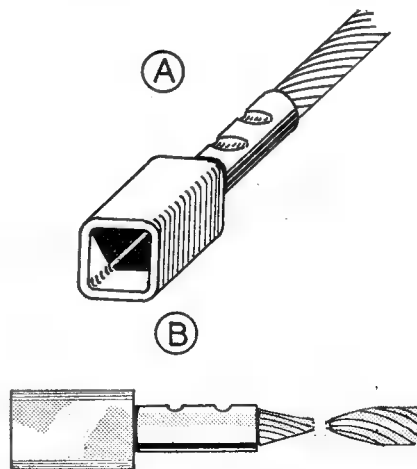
(A) the speedometer cable fixed in the coupling by crimping; (B) the usual form of cable breakage
